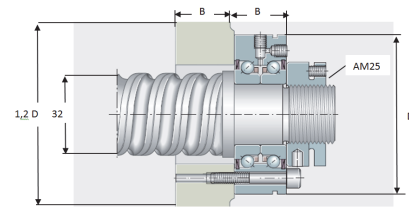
The model of the bearing assembly performed using the bearing ZKLF 2575-2Z
